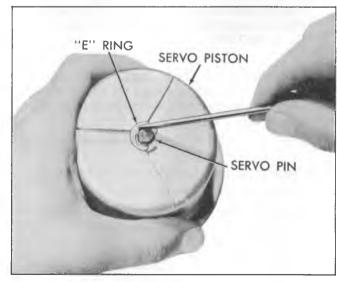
T--Removing Retaining "E" Ring from Rear Servo Pin
